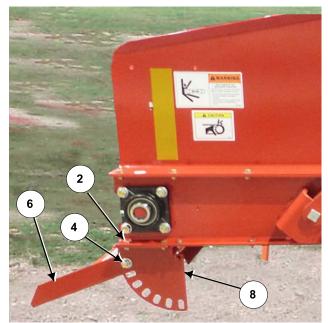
Attach Right Adjustment Bracket Position and Fasten Deflector
